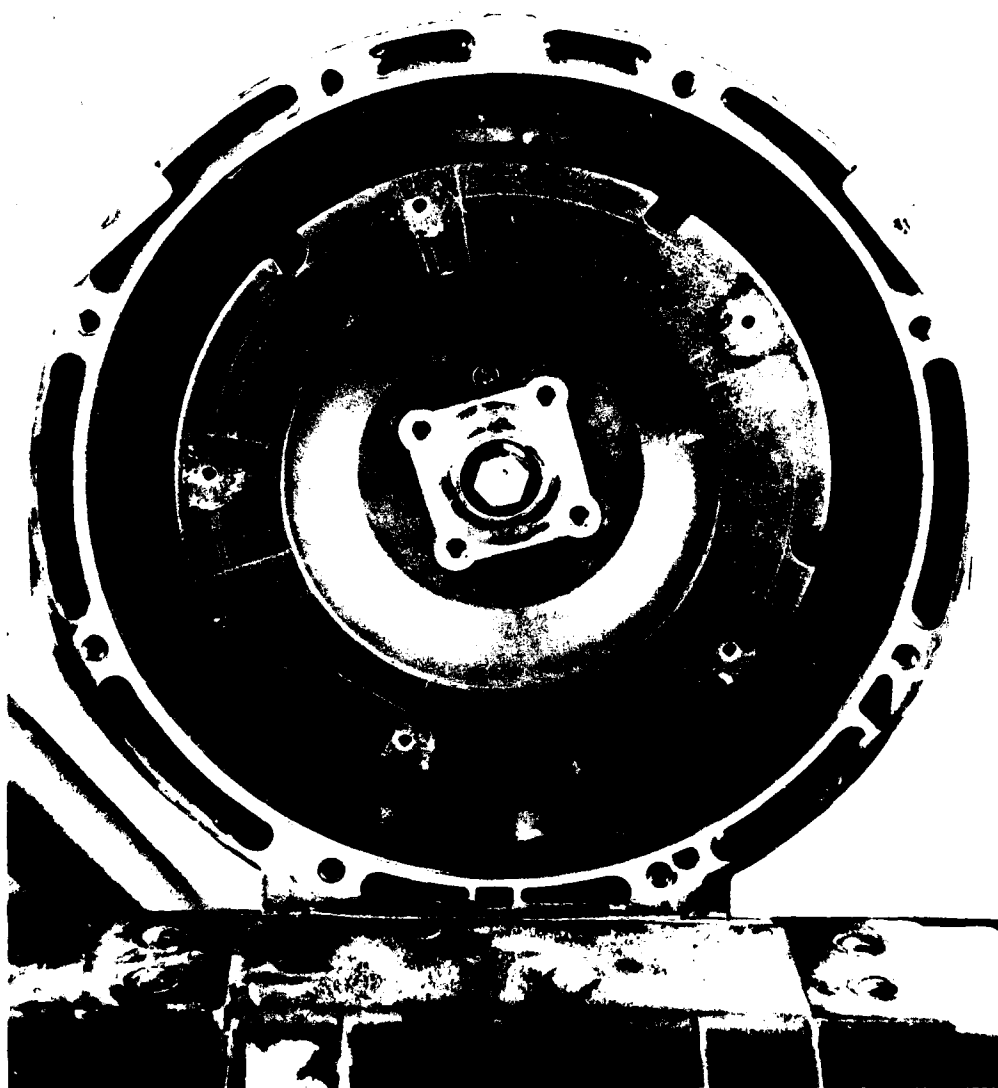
6-hp MIL STD engine flywheel and flywheel housing- standard configuration.
